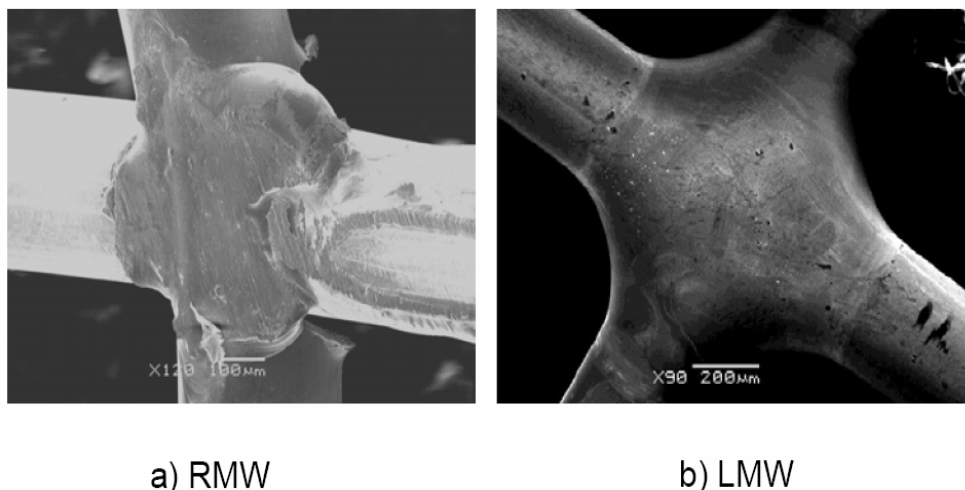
Crossed SS and Pt/IR dissimilar weld
